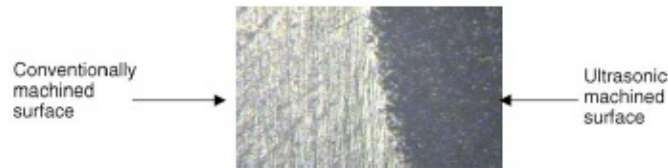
Machined surface showing comparison of conventional machining and USM at 100X [26]
